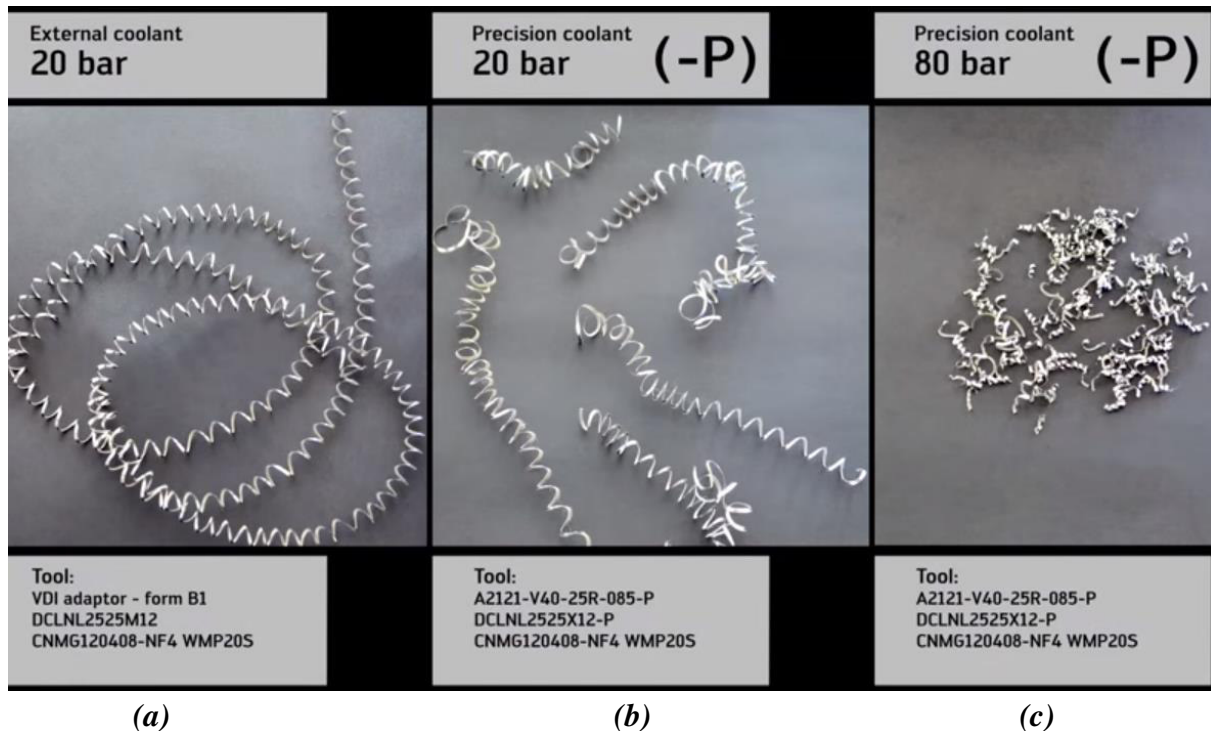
Chip formation comparison finish turning by Walter Tools: (a) Chip formed when conventional tool holder with external coolant 20 bar is used; (b) Chip formed when Precision Cooling (-P) turning tool holder with direct coolant 20 bar is used (c) Chip formed when Precision Cooling (-P) turning tool holder with direct coolant 80 bar is used [13]
